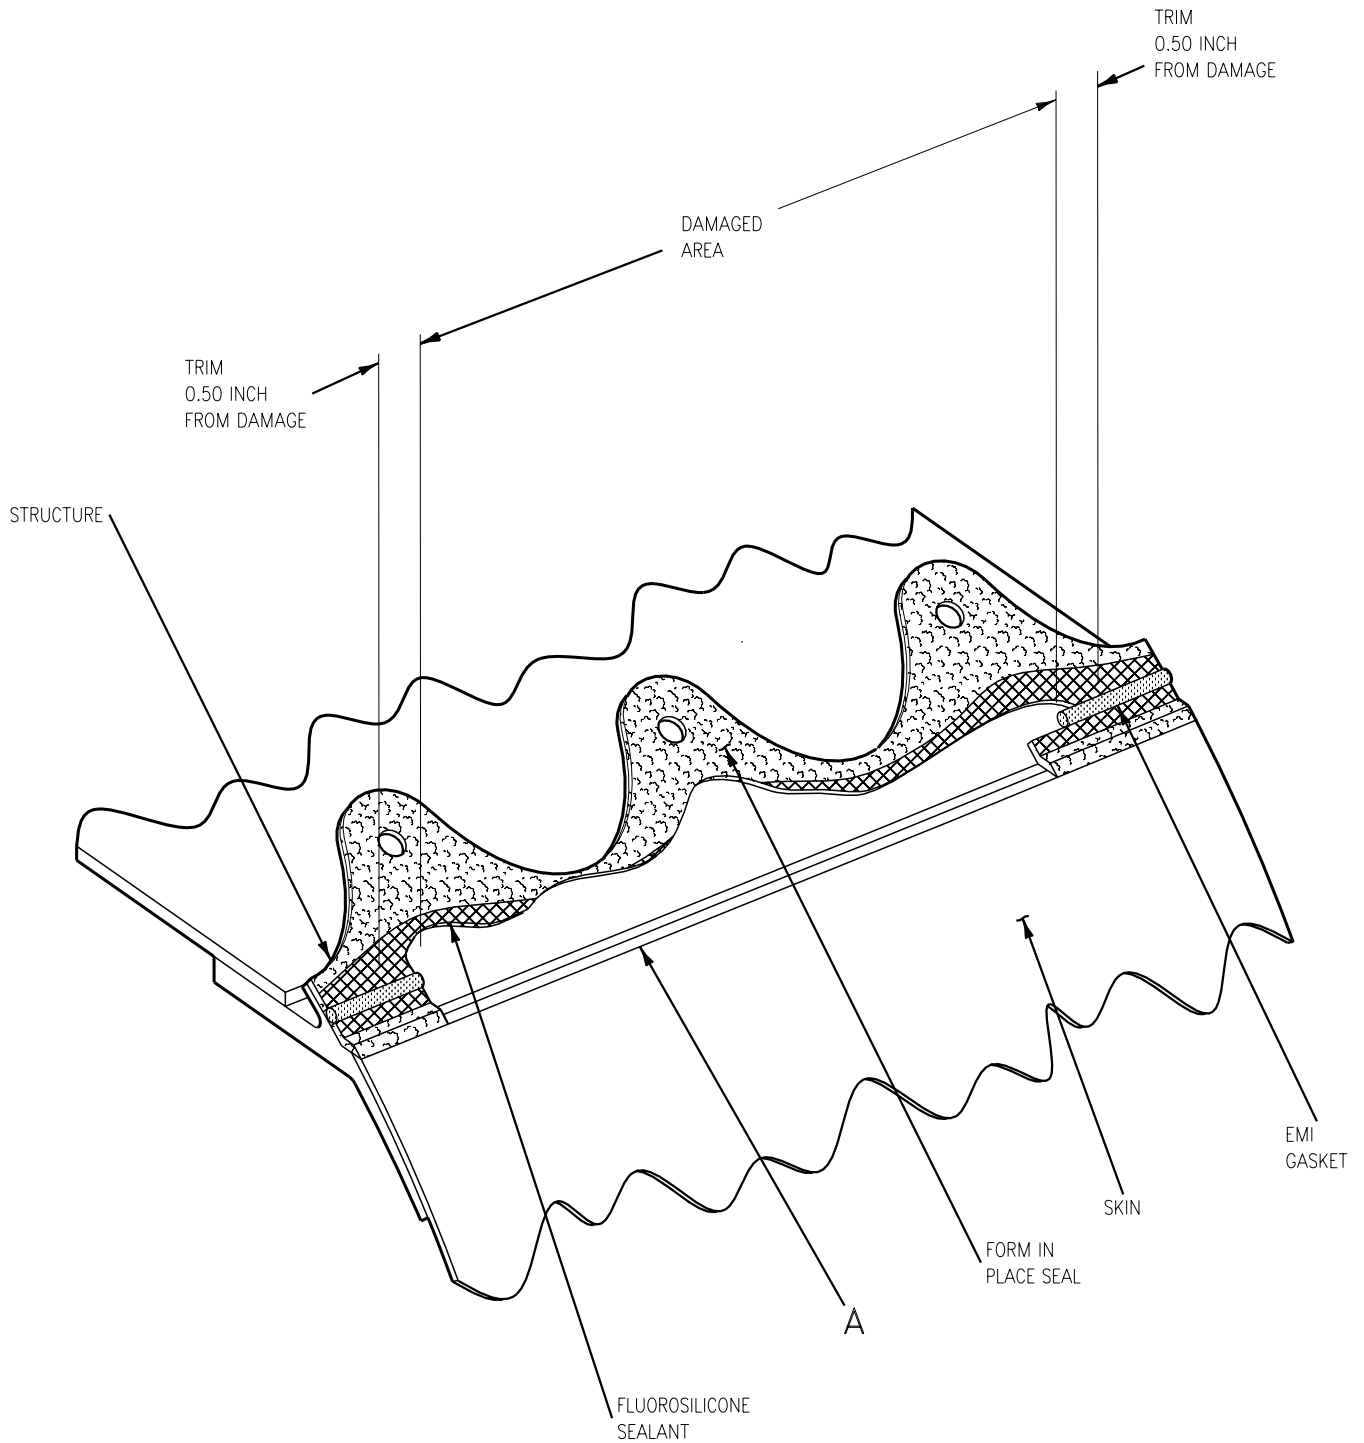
Form In Place Seal Damage More Than 0.80 Inch (Sheet 1)
